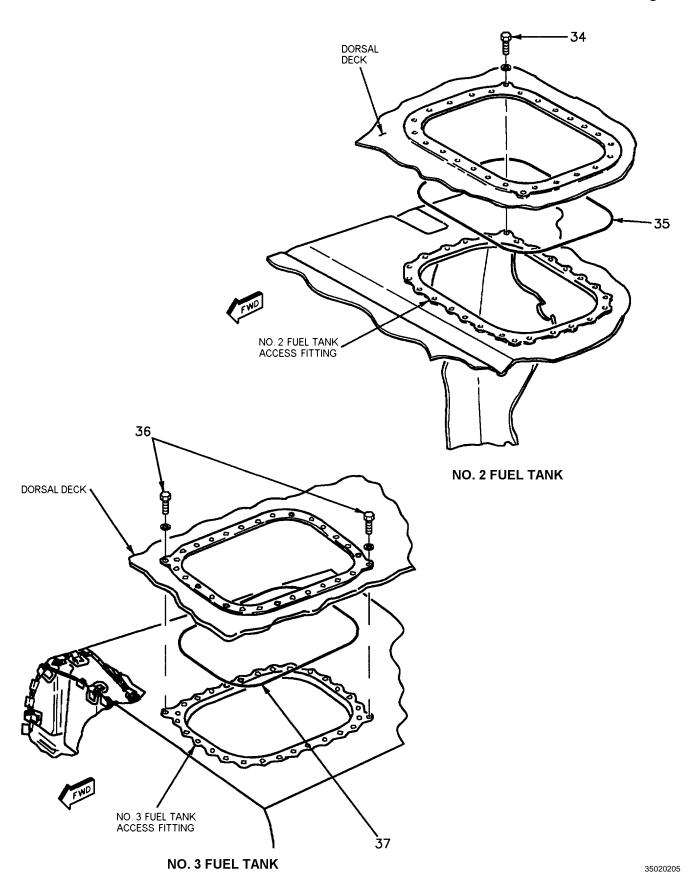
Fuel Tank Access Fittings (Sheet 5)
